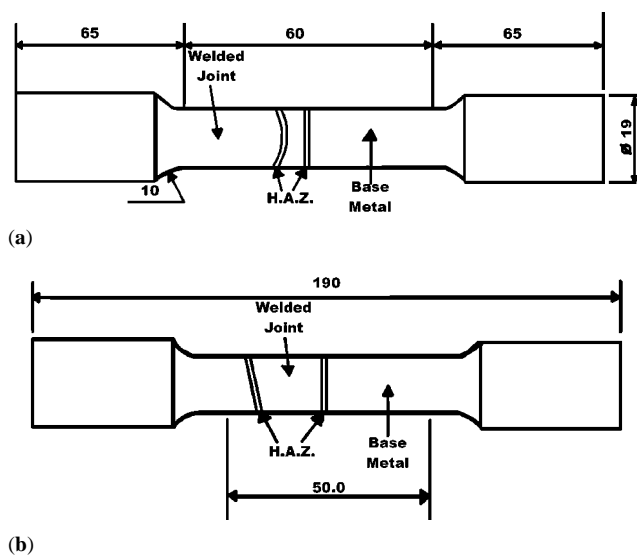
Tensile testpieces of the welded joint. (a) Testpiece from the half-thickness region of the plate. (b) Testpiece from the surface of the plate. The dimensions of the testpieces from the BM are similar. Dimensions in millimeters
